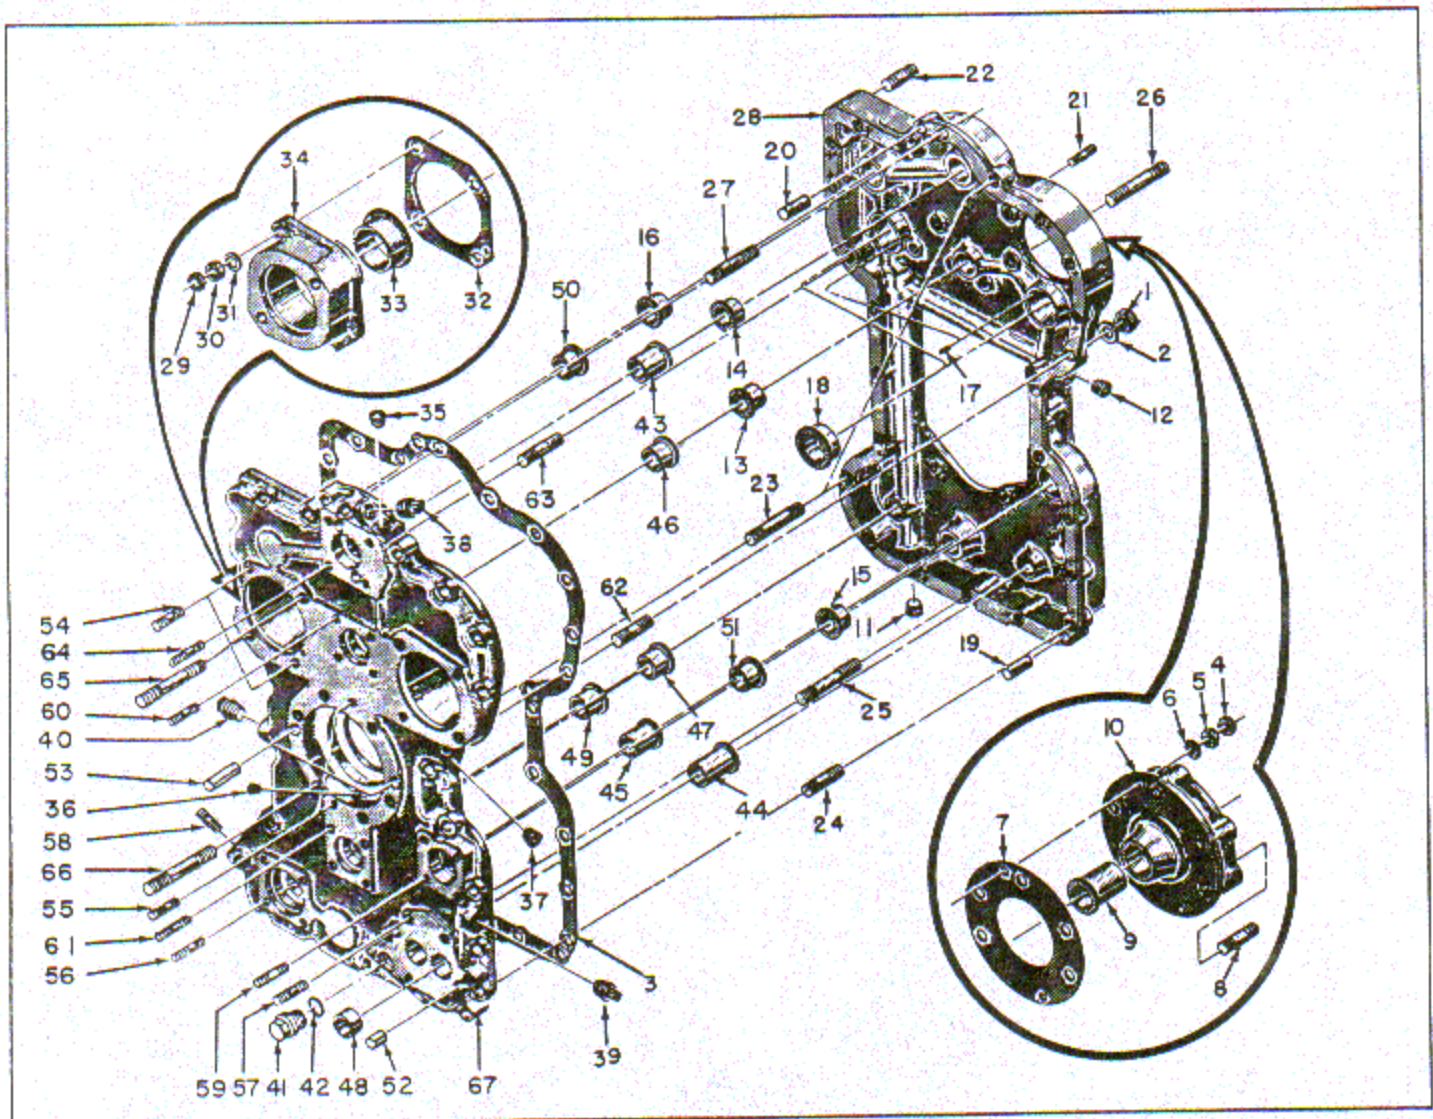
View of Accessory Case Front and Rear Machining Assembly (Sheet 2 of 2)
